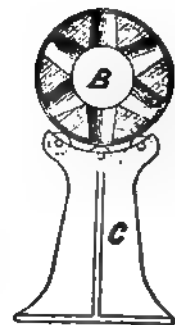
Filling Device of the "Ramsay" Casting Machine.
